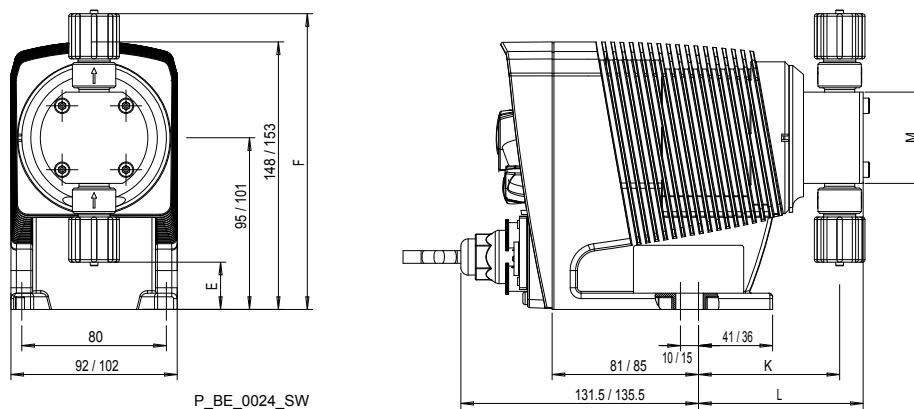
Dimension drawing Beta b BT4b/BT5b, material version TT - dimensions in mm
